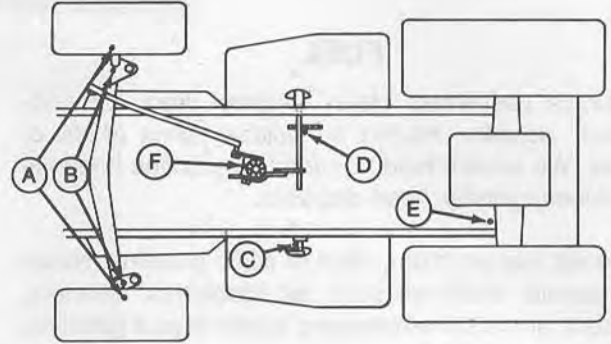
Grease Fitting Locations (Serial No. 30,001-55,000)
